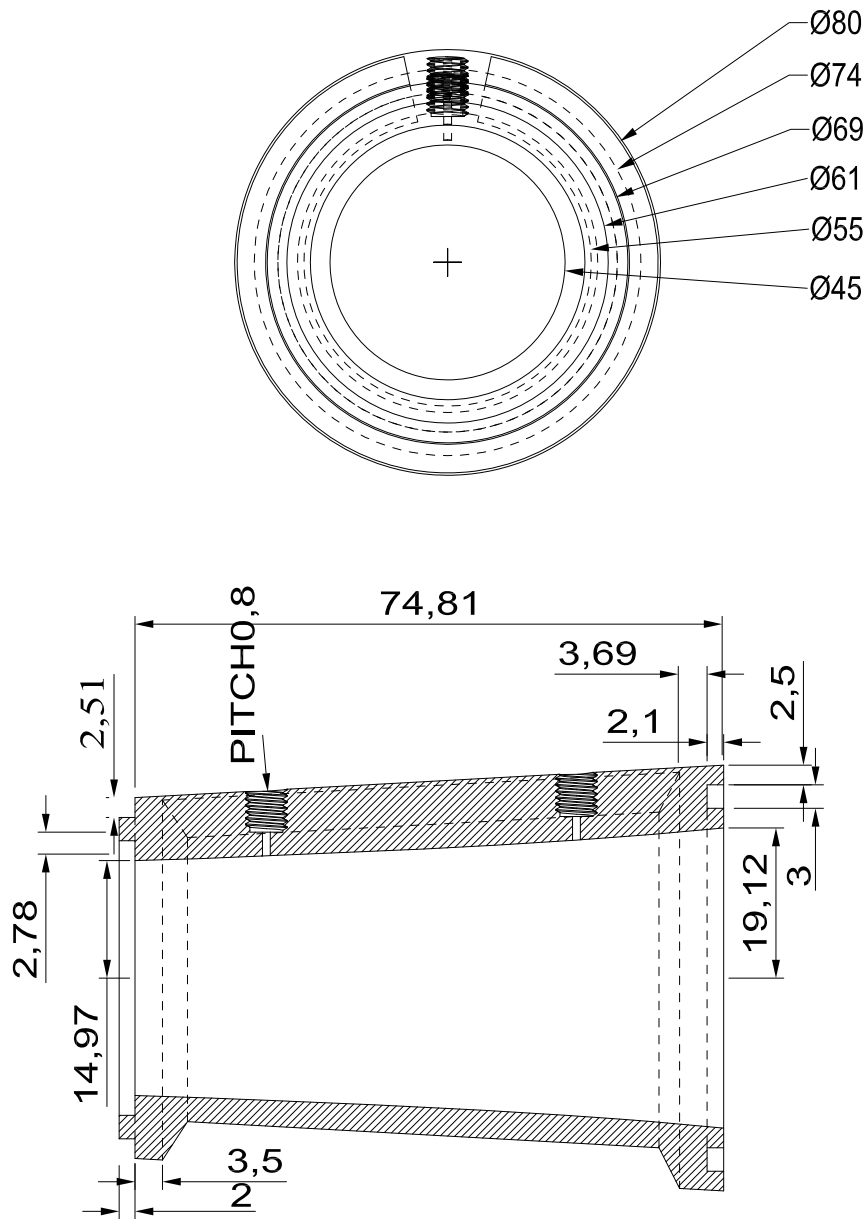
Profile of the part 5 of CRMC ejector with main dimensions, all dimensions in mm.
